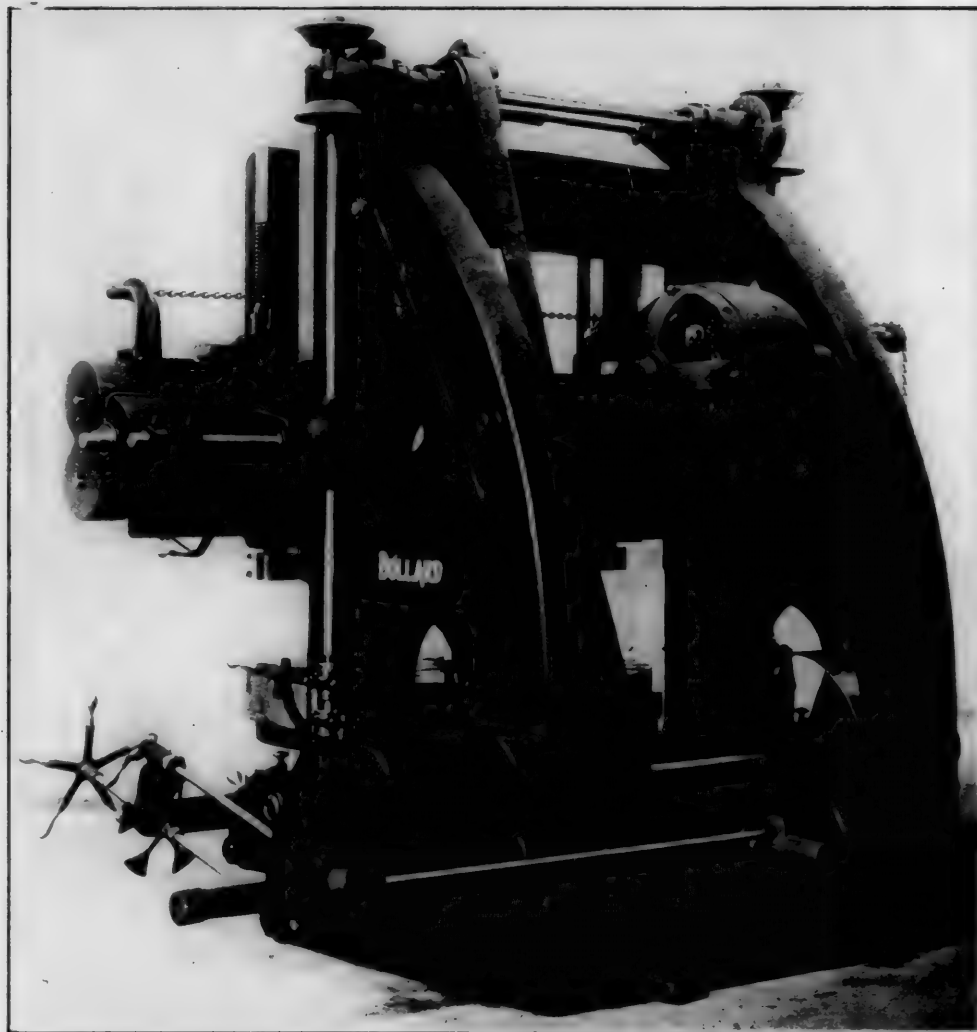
REAR VIEW OF BULLARD BORING MILL, SHOWING APPLICATION OF MOTOR DRIVE.
